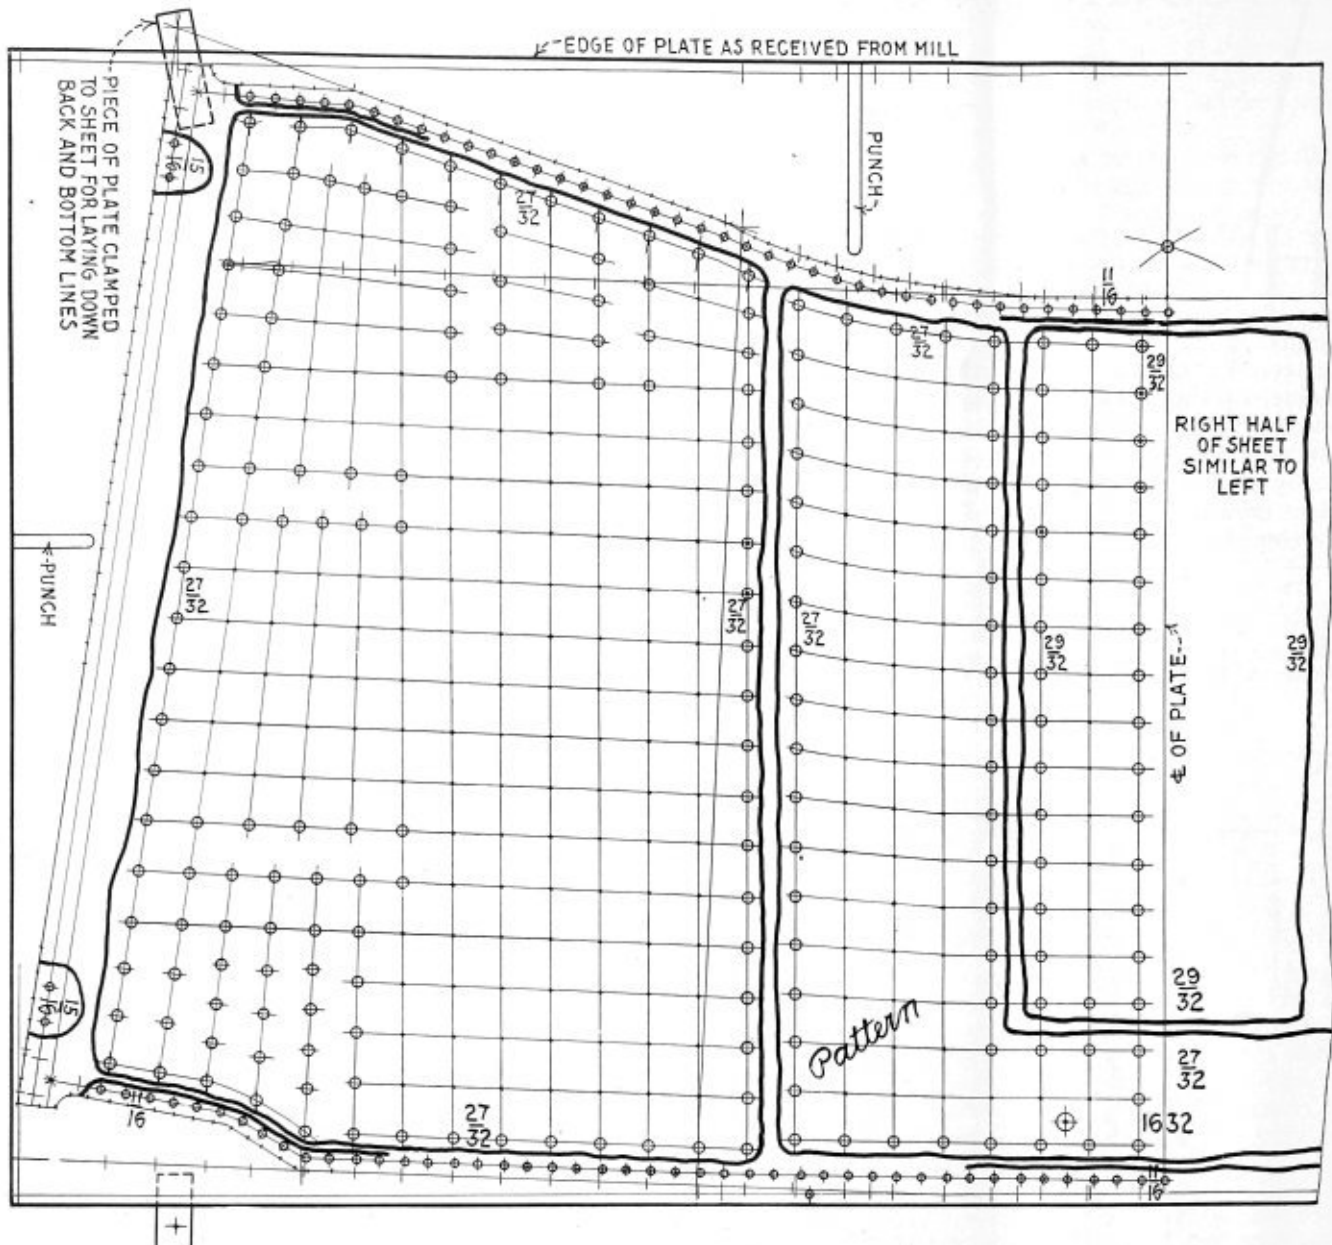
Crown and sides sheet pattern plate layout before any machine work is done on the plate
